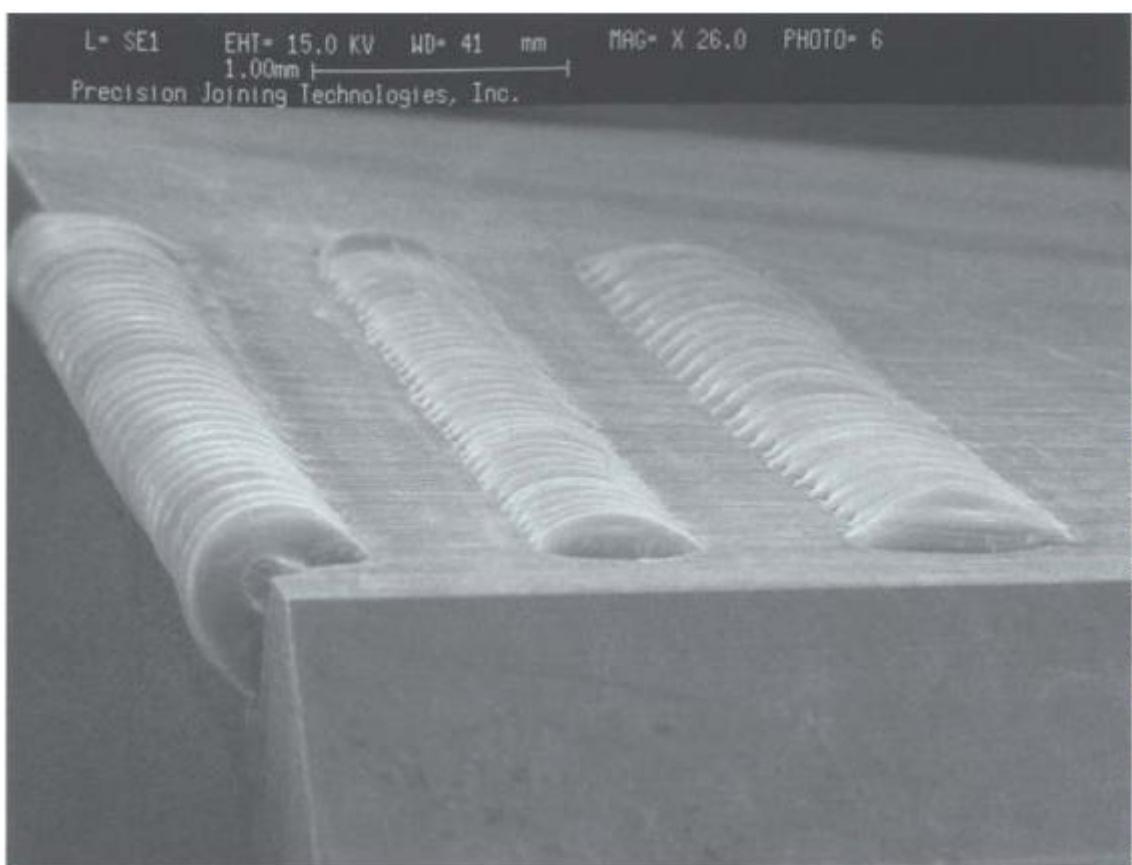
Photograph of typical laser weld build-up of 420 SS mold.
